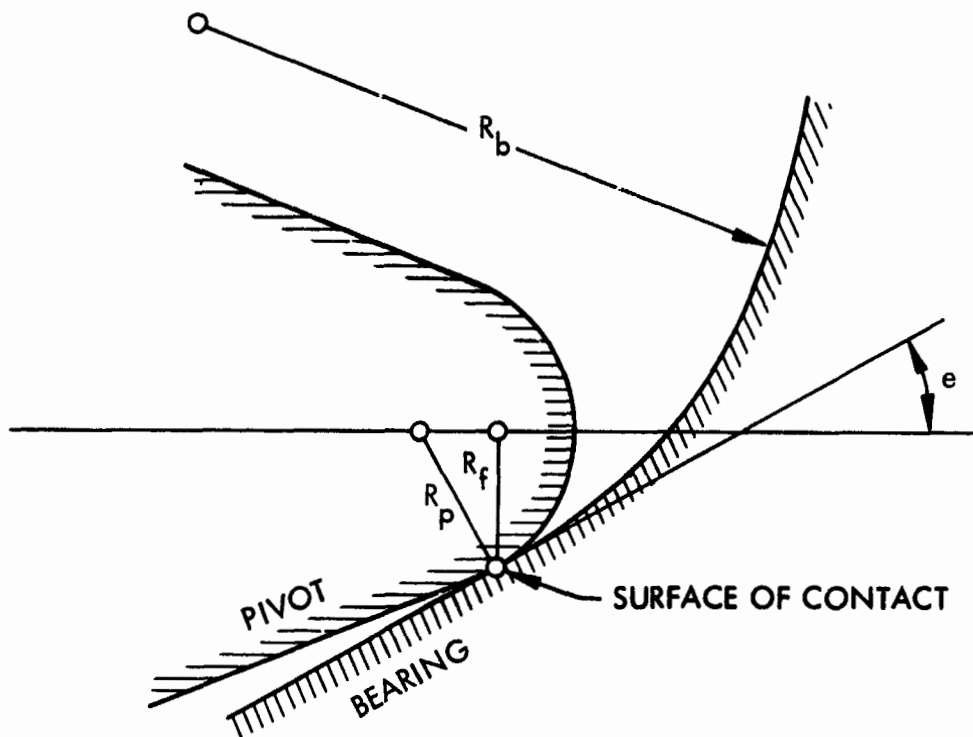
Friction Radius R_f of Conical Pivot Bearing
